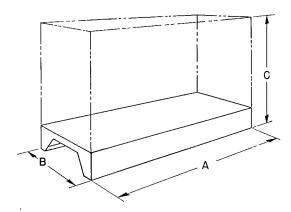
Belt Drive, Direct Drive and Duplex Compressor Unit
